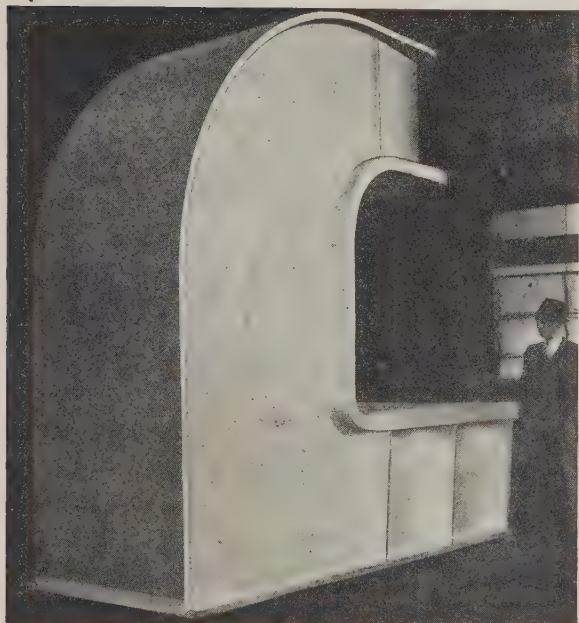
WELDED FRAME FOR C-TYPE, OR OPEN-SIDE, HYDRAULIC PRESS
